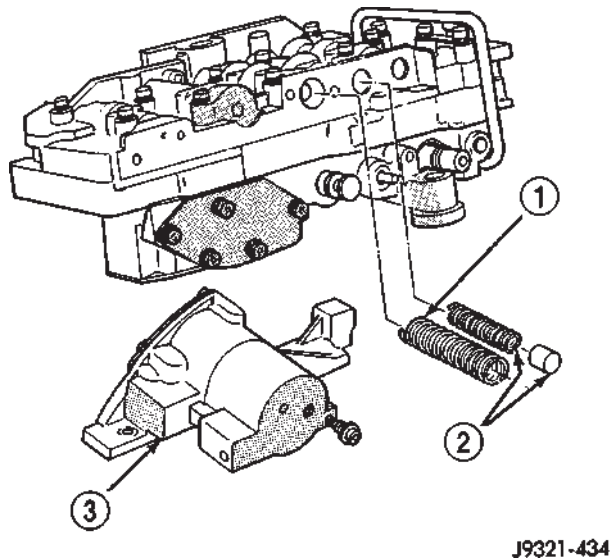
Accumulator Housing, Valve Springs, and Plug
